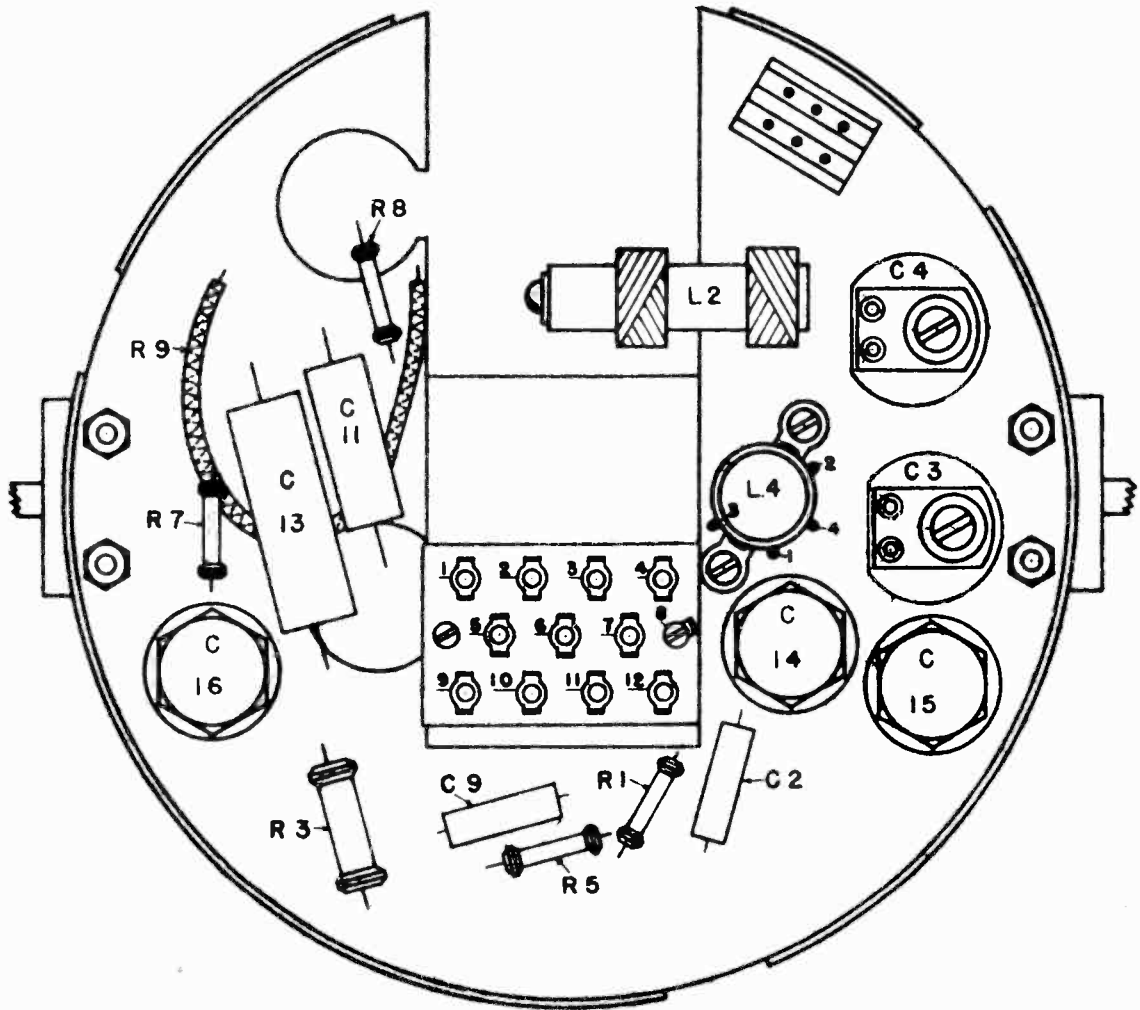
TOP VIEW OF CHASSIS - MODELS 700 - 701 - 702
